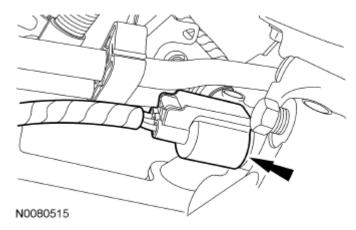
Locating Transaxle Fluid Cooler Tubes Courtesy of FORD MOTOR CO.
